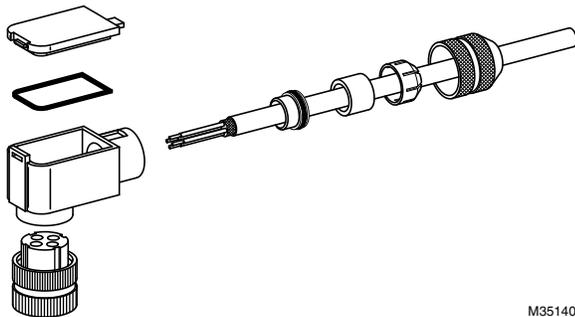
ASY786 Viewing Head Plug Assembly with C330S.
